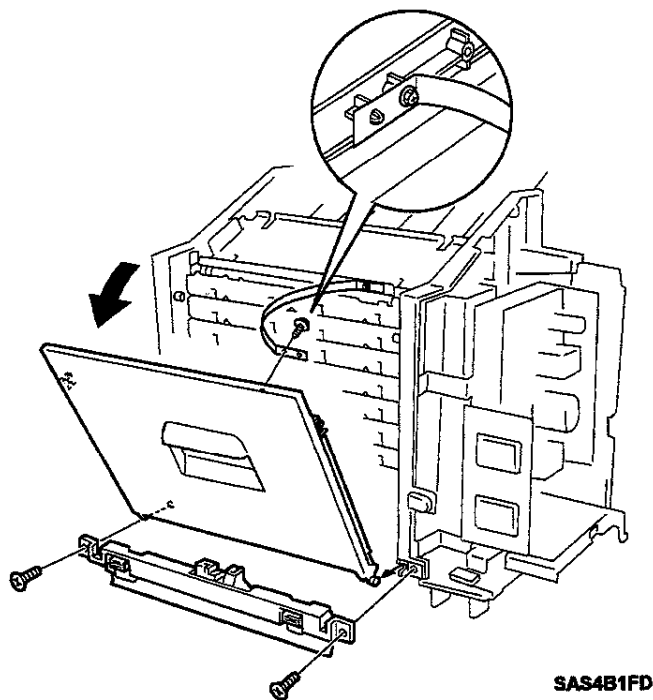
Removing the Rear Chute and Lower Chute Assembly
